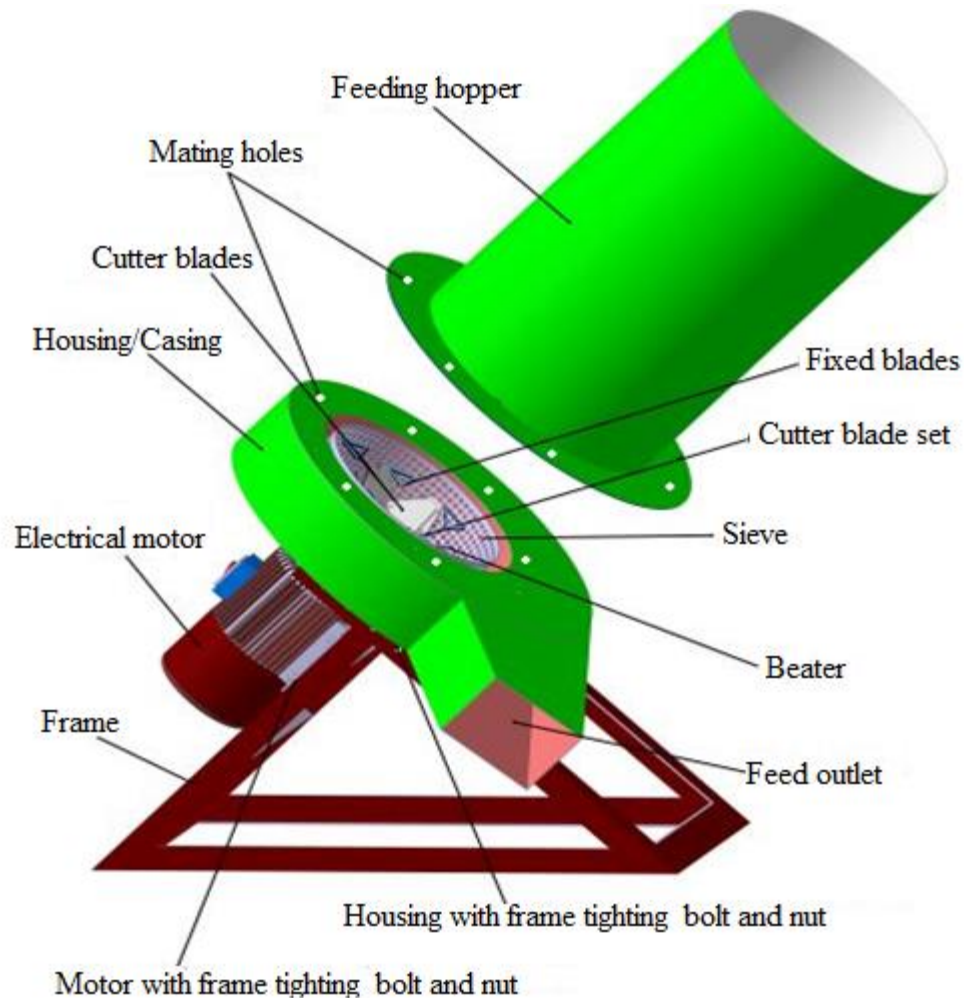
3D view of grinder machine developed by CATIA V5 R20 software
